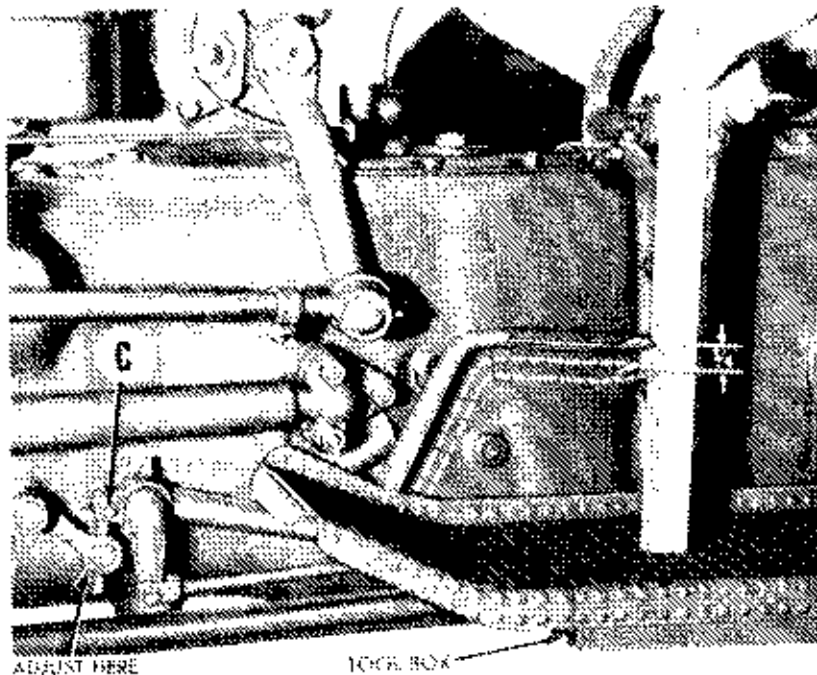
To adjust clutch pedal free travel remove pin (C) and rotate the eye bolt.
